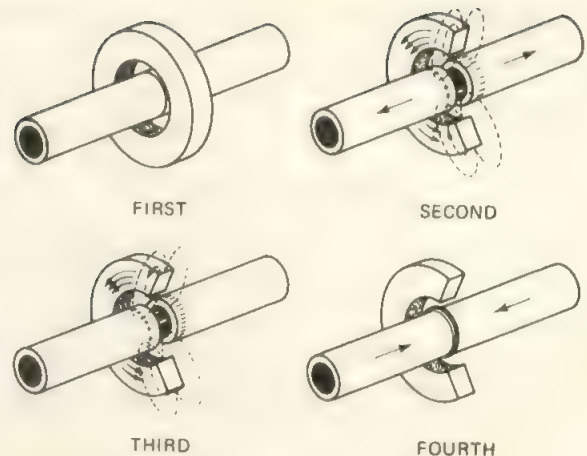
Magnetic rotating arc welding.
